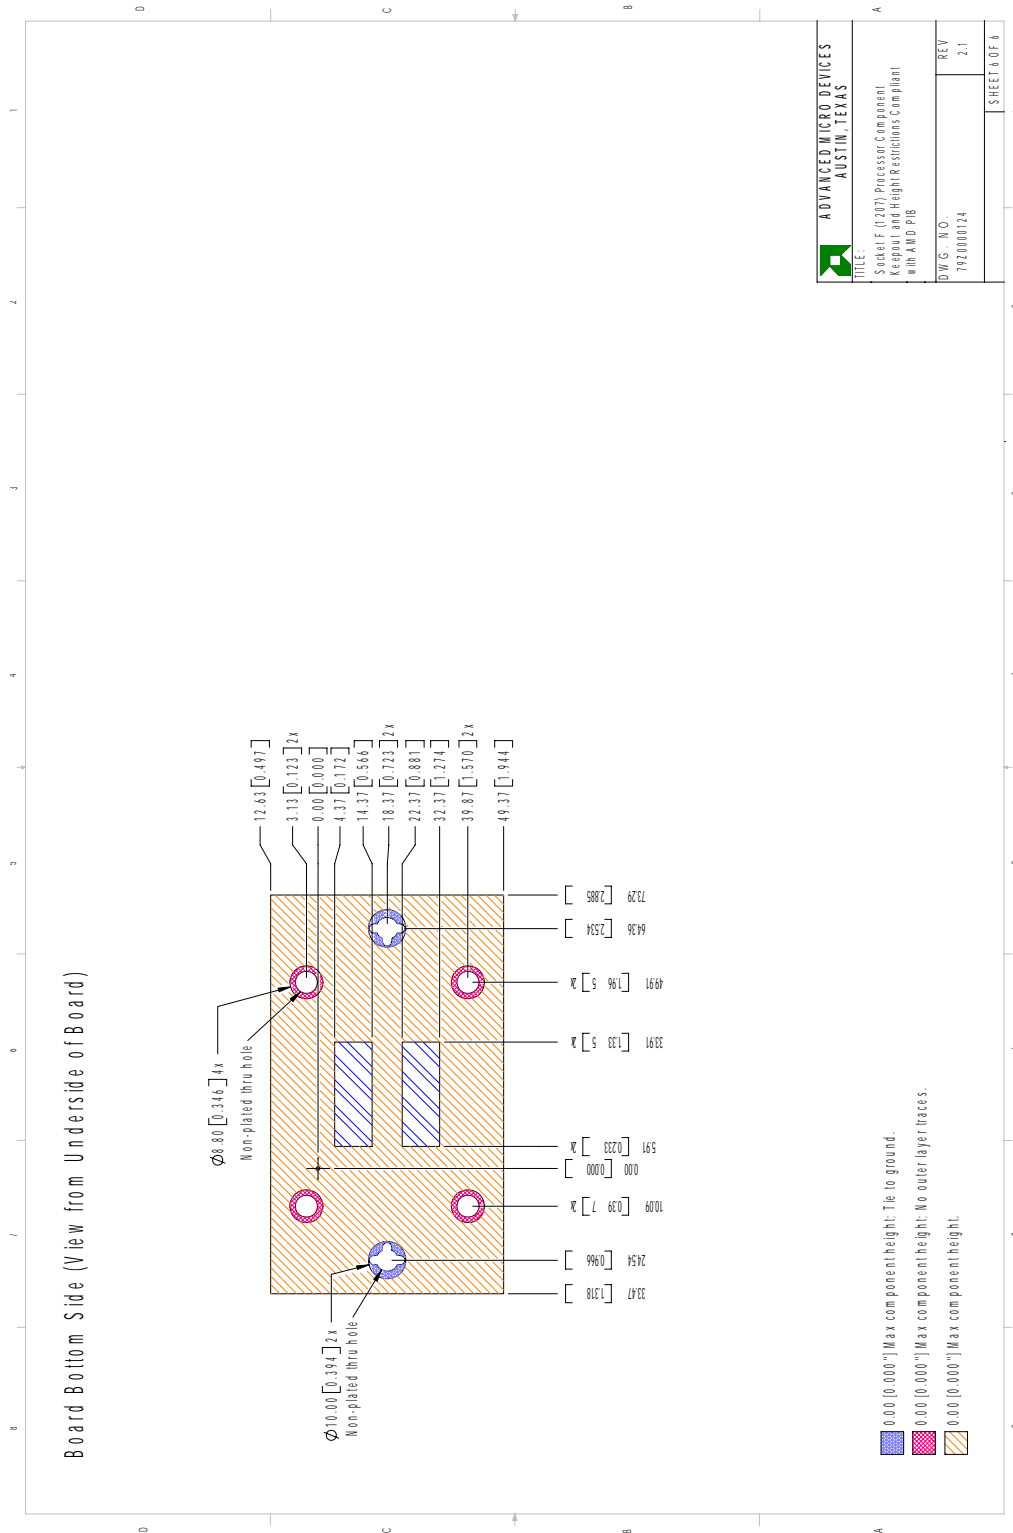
Socket F (1207) PIB Board Bottom Side Keep-Out
